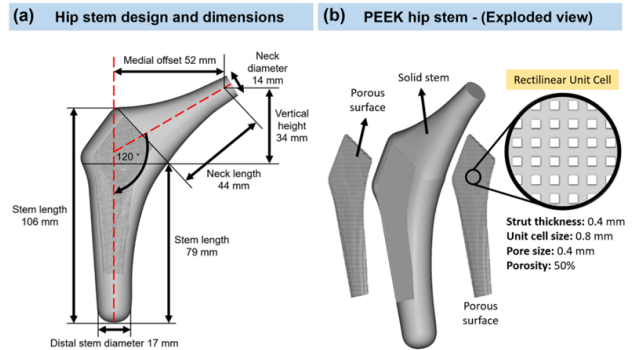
(a) Design and dimensions of the hip stem. (b) Isometric exploded view of the PEEK hip stem
